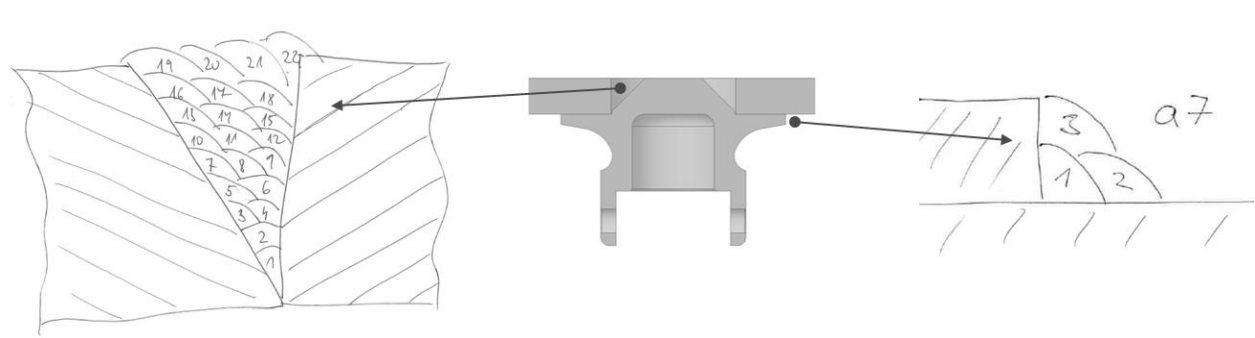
The weld of support column adapter to annulus – inner side (left) and outer side (right), schematics of weld passes deposition layout
